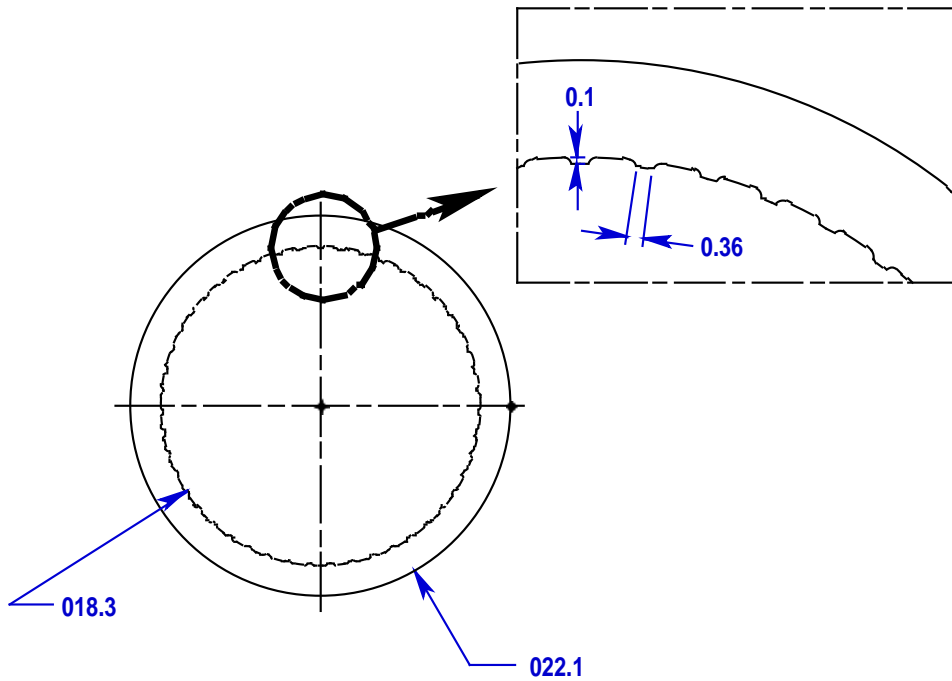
Vanadium tube cross section and magnification of axial grooves (dimensions in mm).
